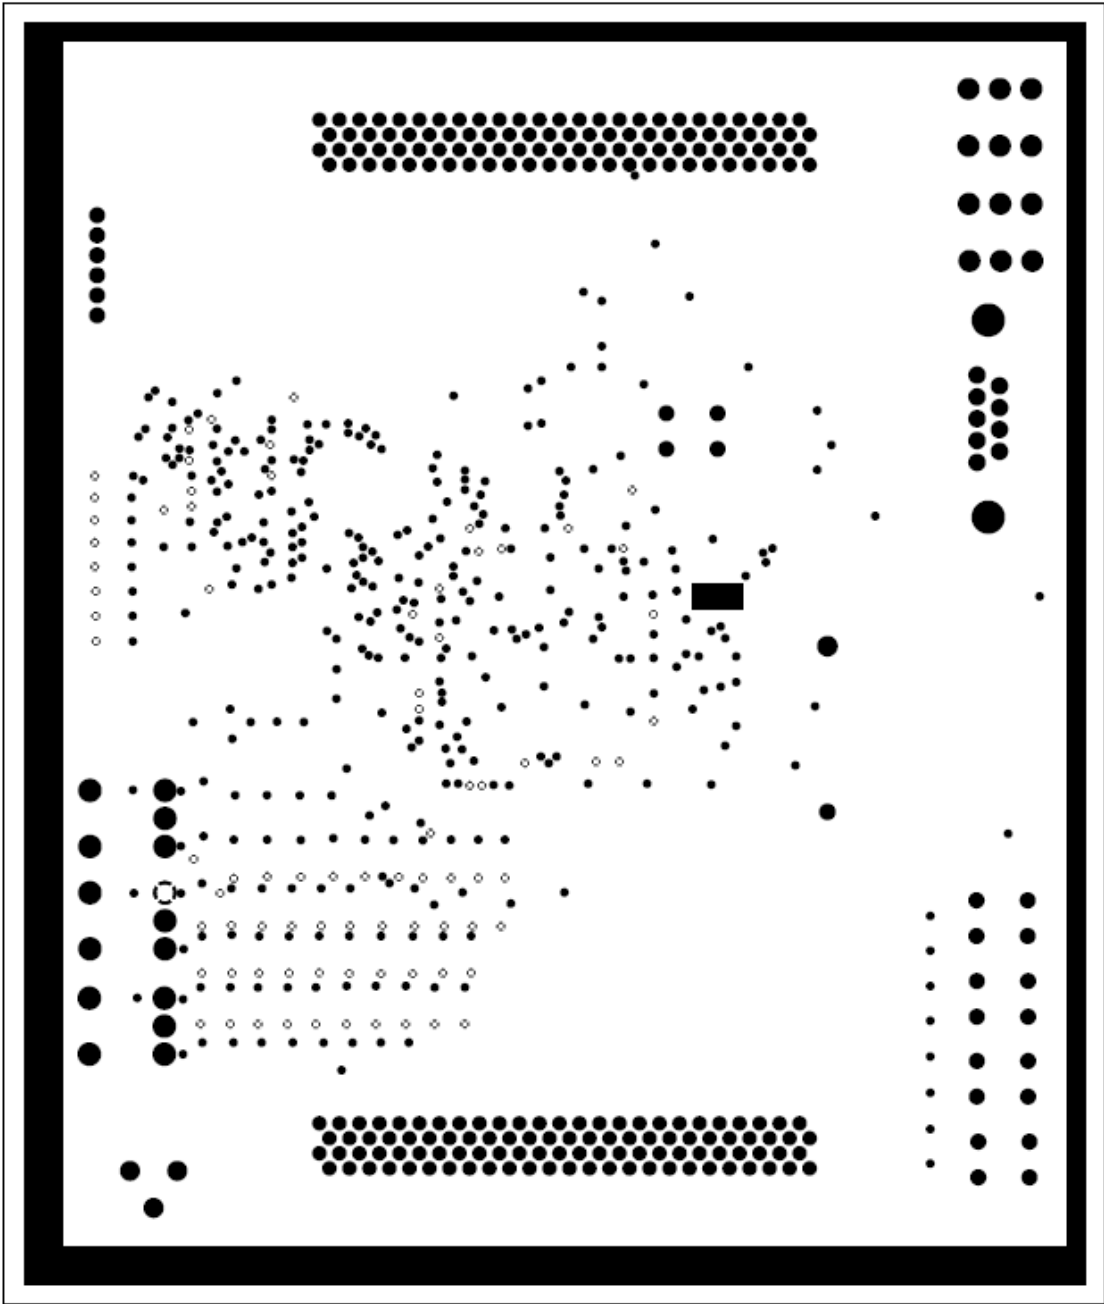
PCB VCC2V5 Internal Power Plane Layer
